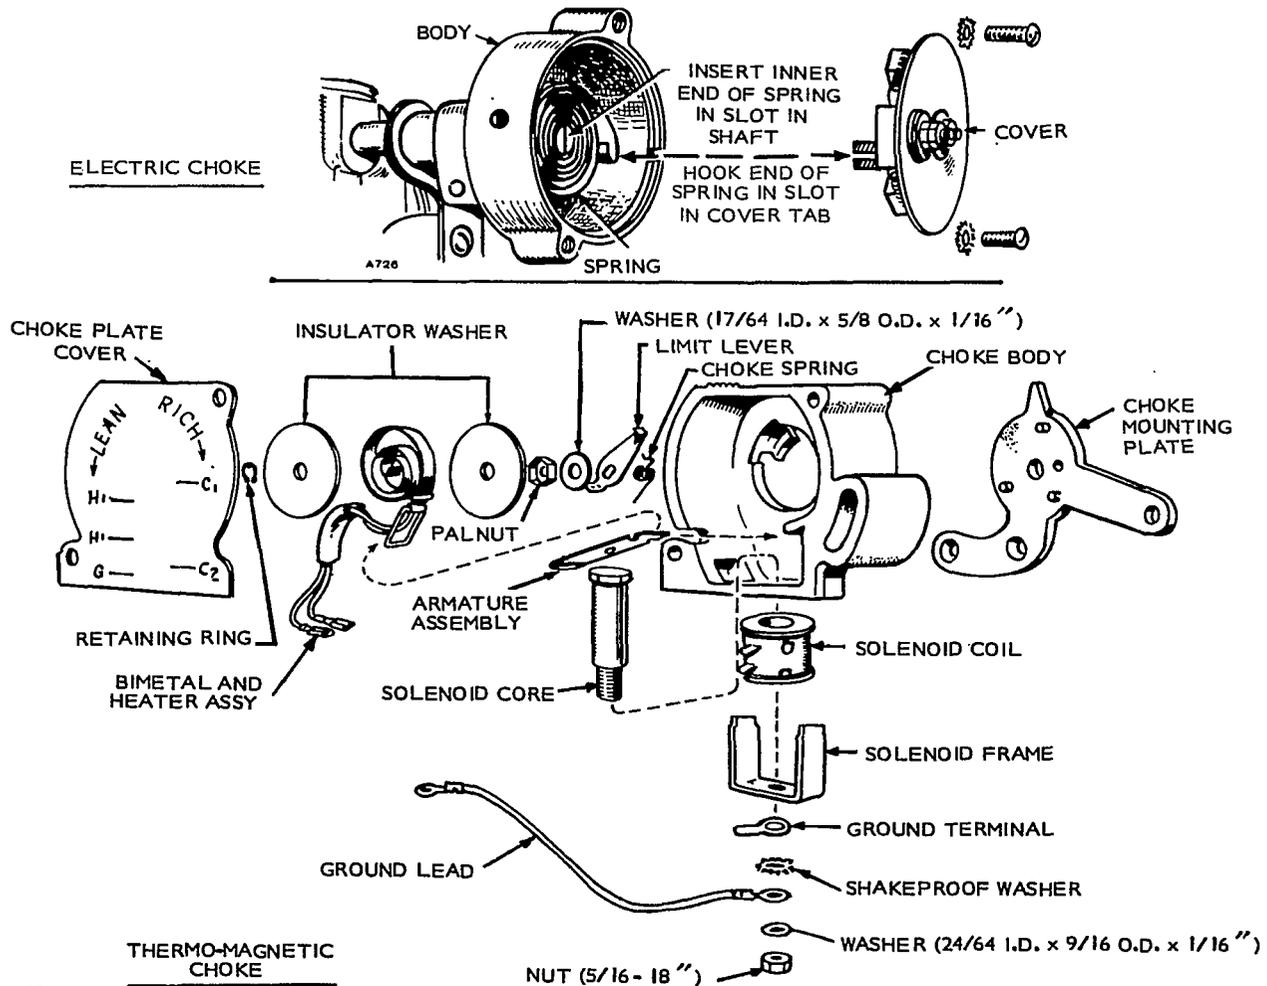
DISASSEMBLY OF ELECTRIC AND THERMO-ELECTRIC CHOKE
